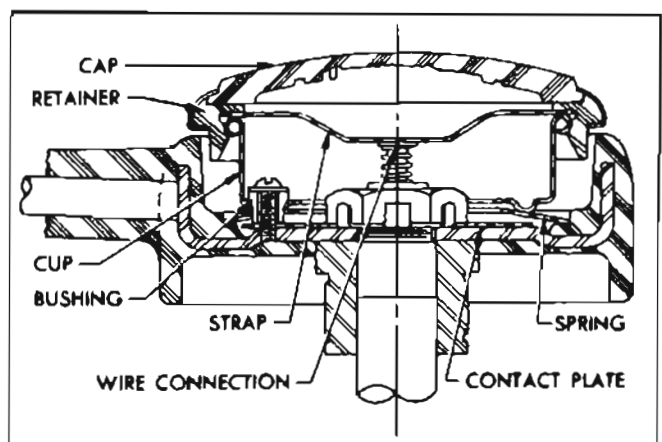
Horn Button Parts in Solid Spoke Steering Wheel
